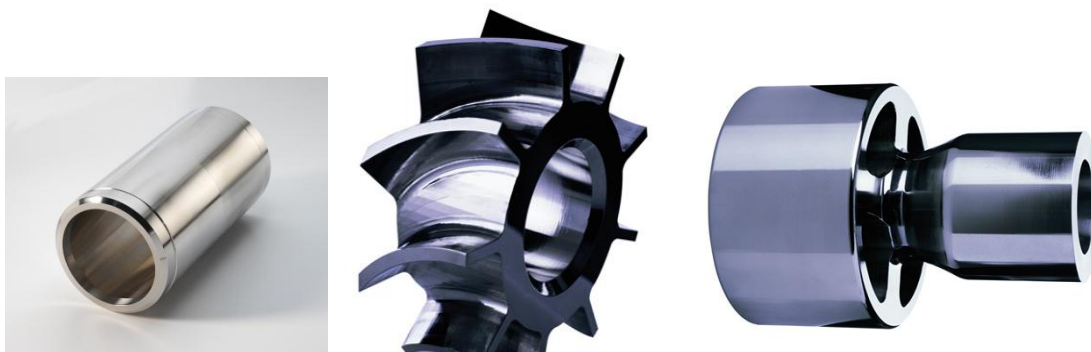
Examples of complex shape parts with Hardide coating: a pump cylinder ID coated (left), down-hole tool parts: a turbine (centre) and a flow diverter (right).
